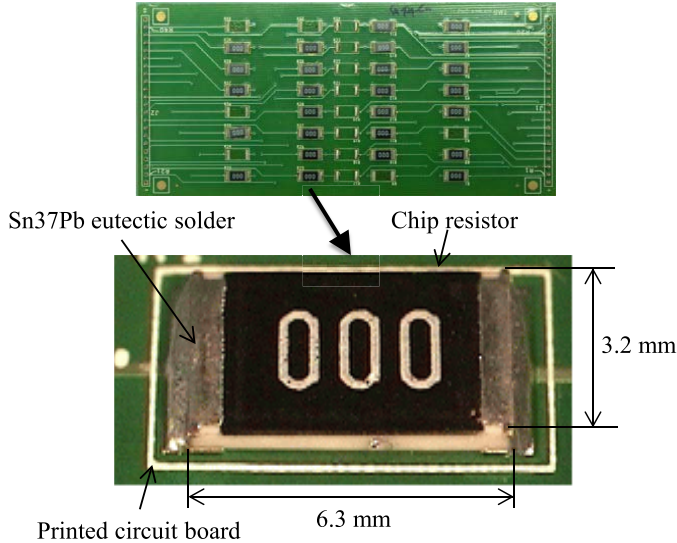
6332-type solder joint assembly used in ATC tests.
